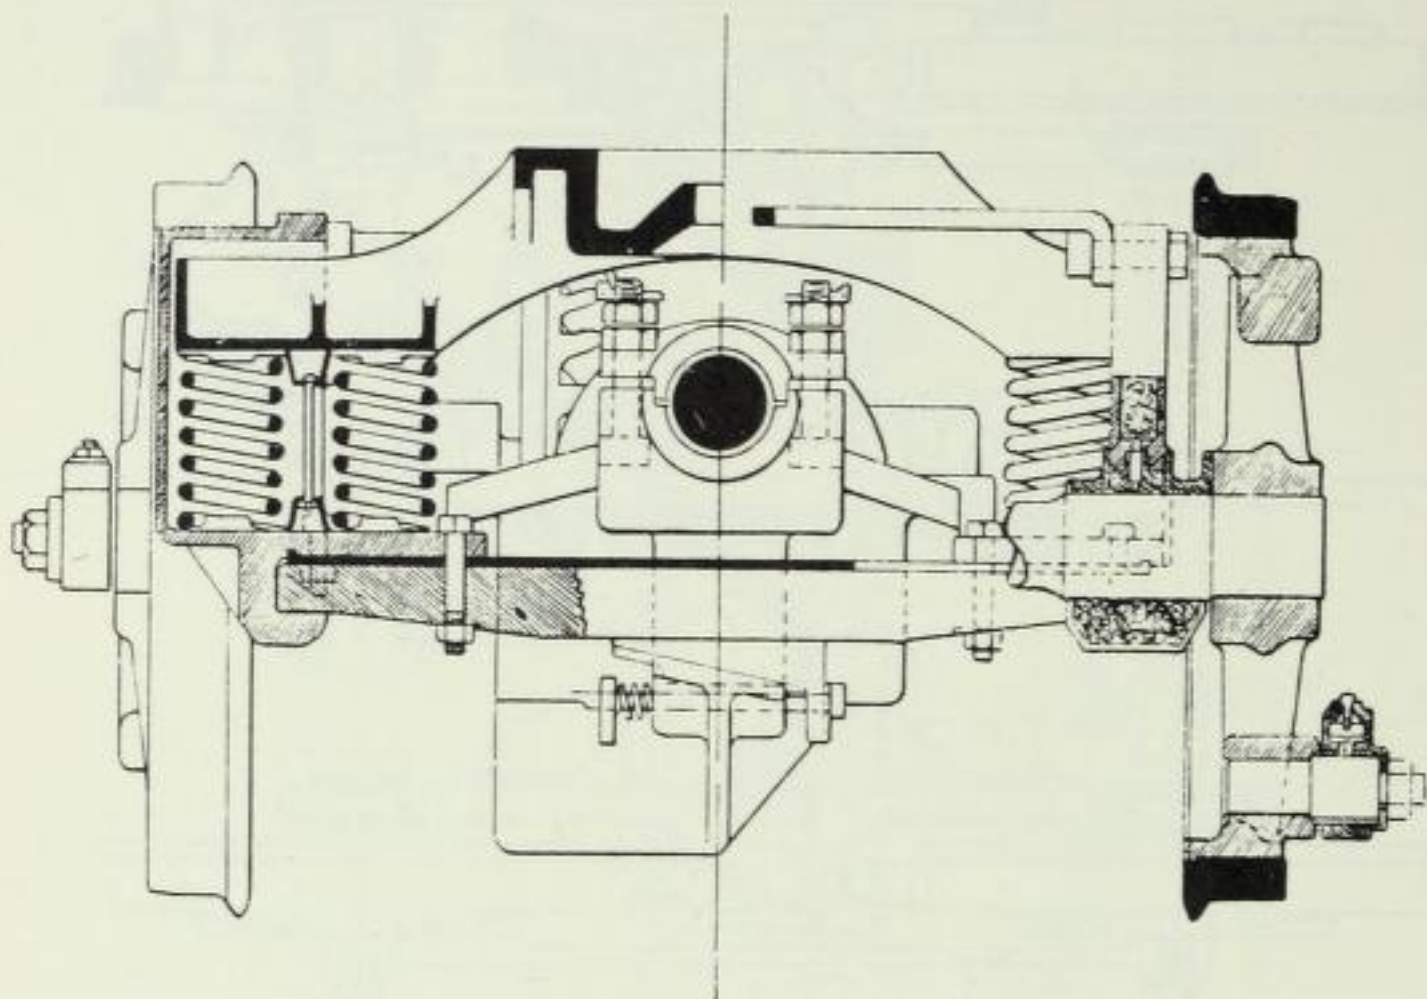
Heisler Geared Truck showing Construction of Spring Bar, Flexible-tongued Bottom Plate and Supporting Bar Gear Case as attached to Side Frames.
